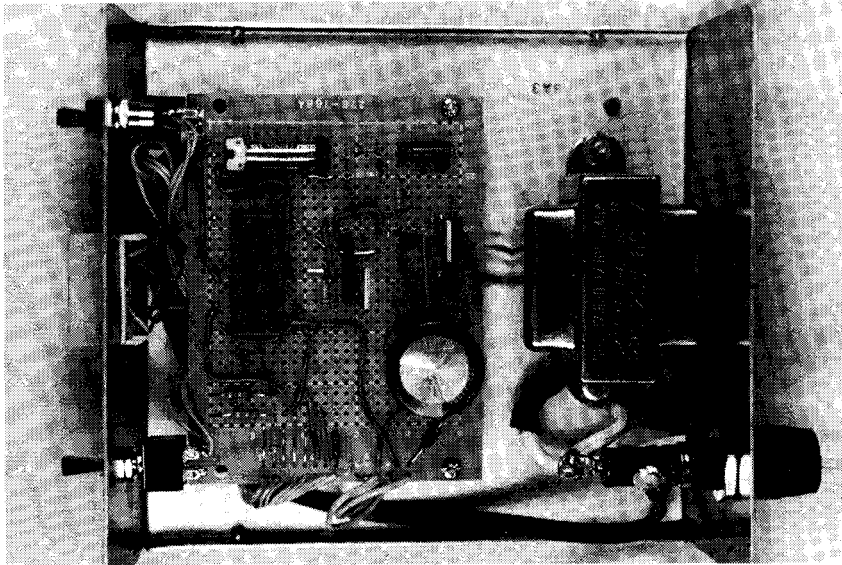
THE FINISHED BOARD can be mounted in a metal case. Jacks J1 and J2, switches S1 and S2, and LED1 are mounted on the front panel.
